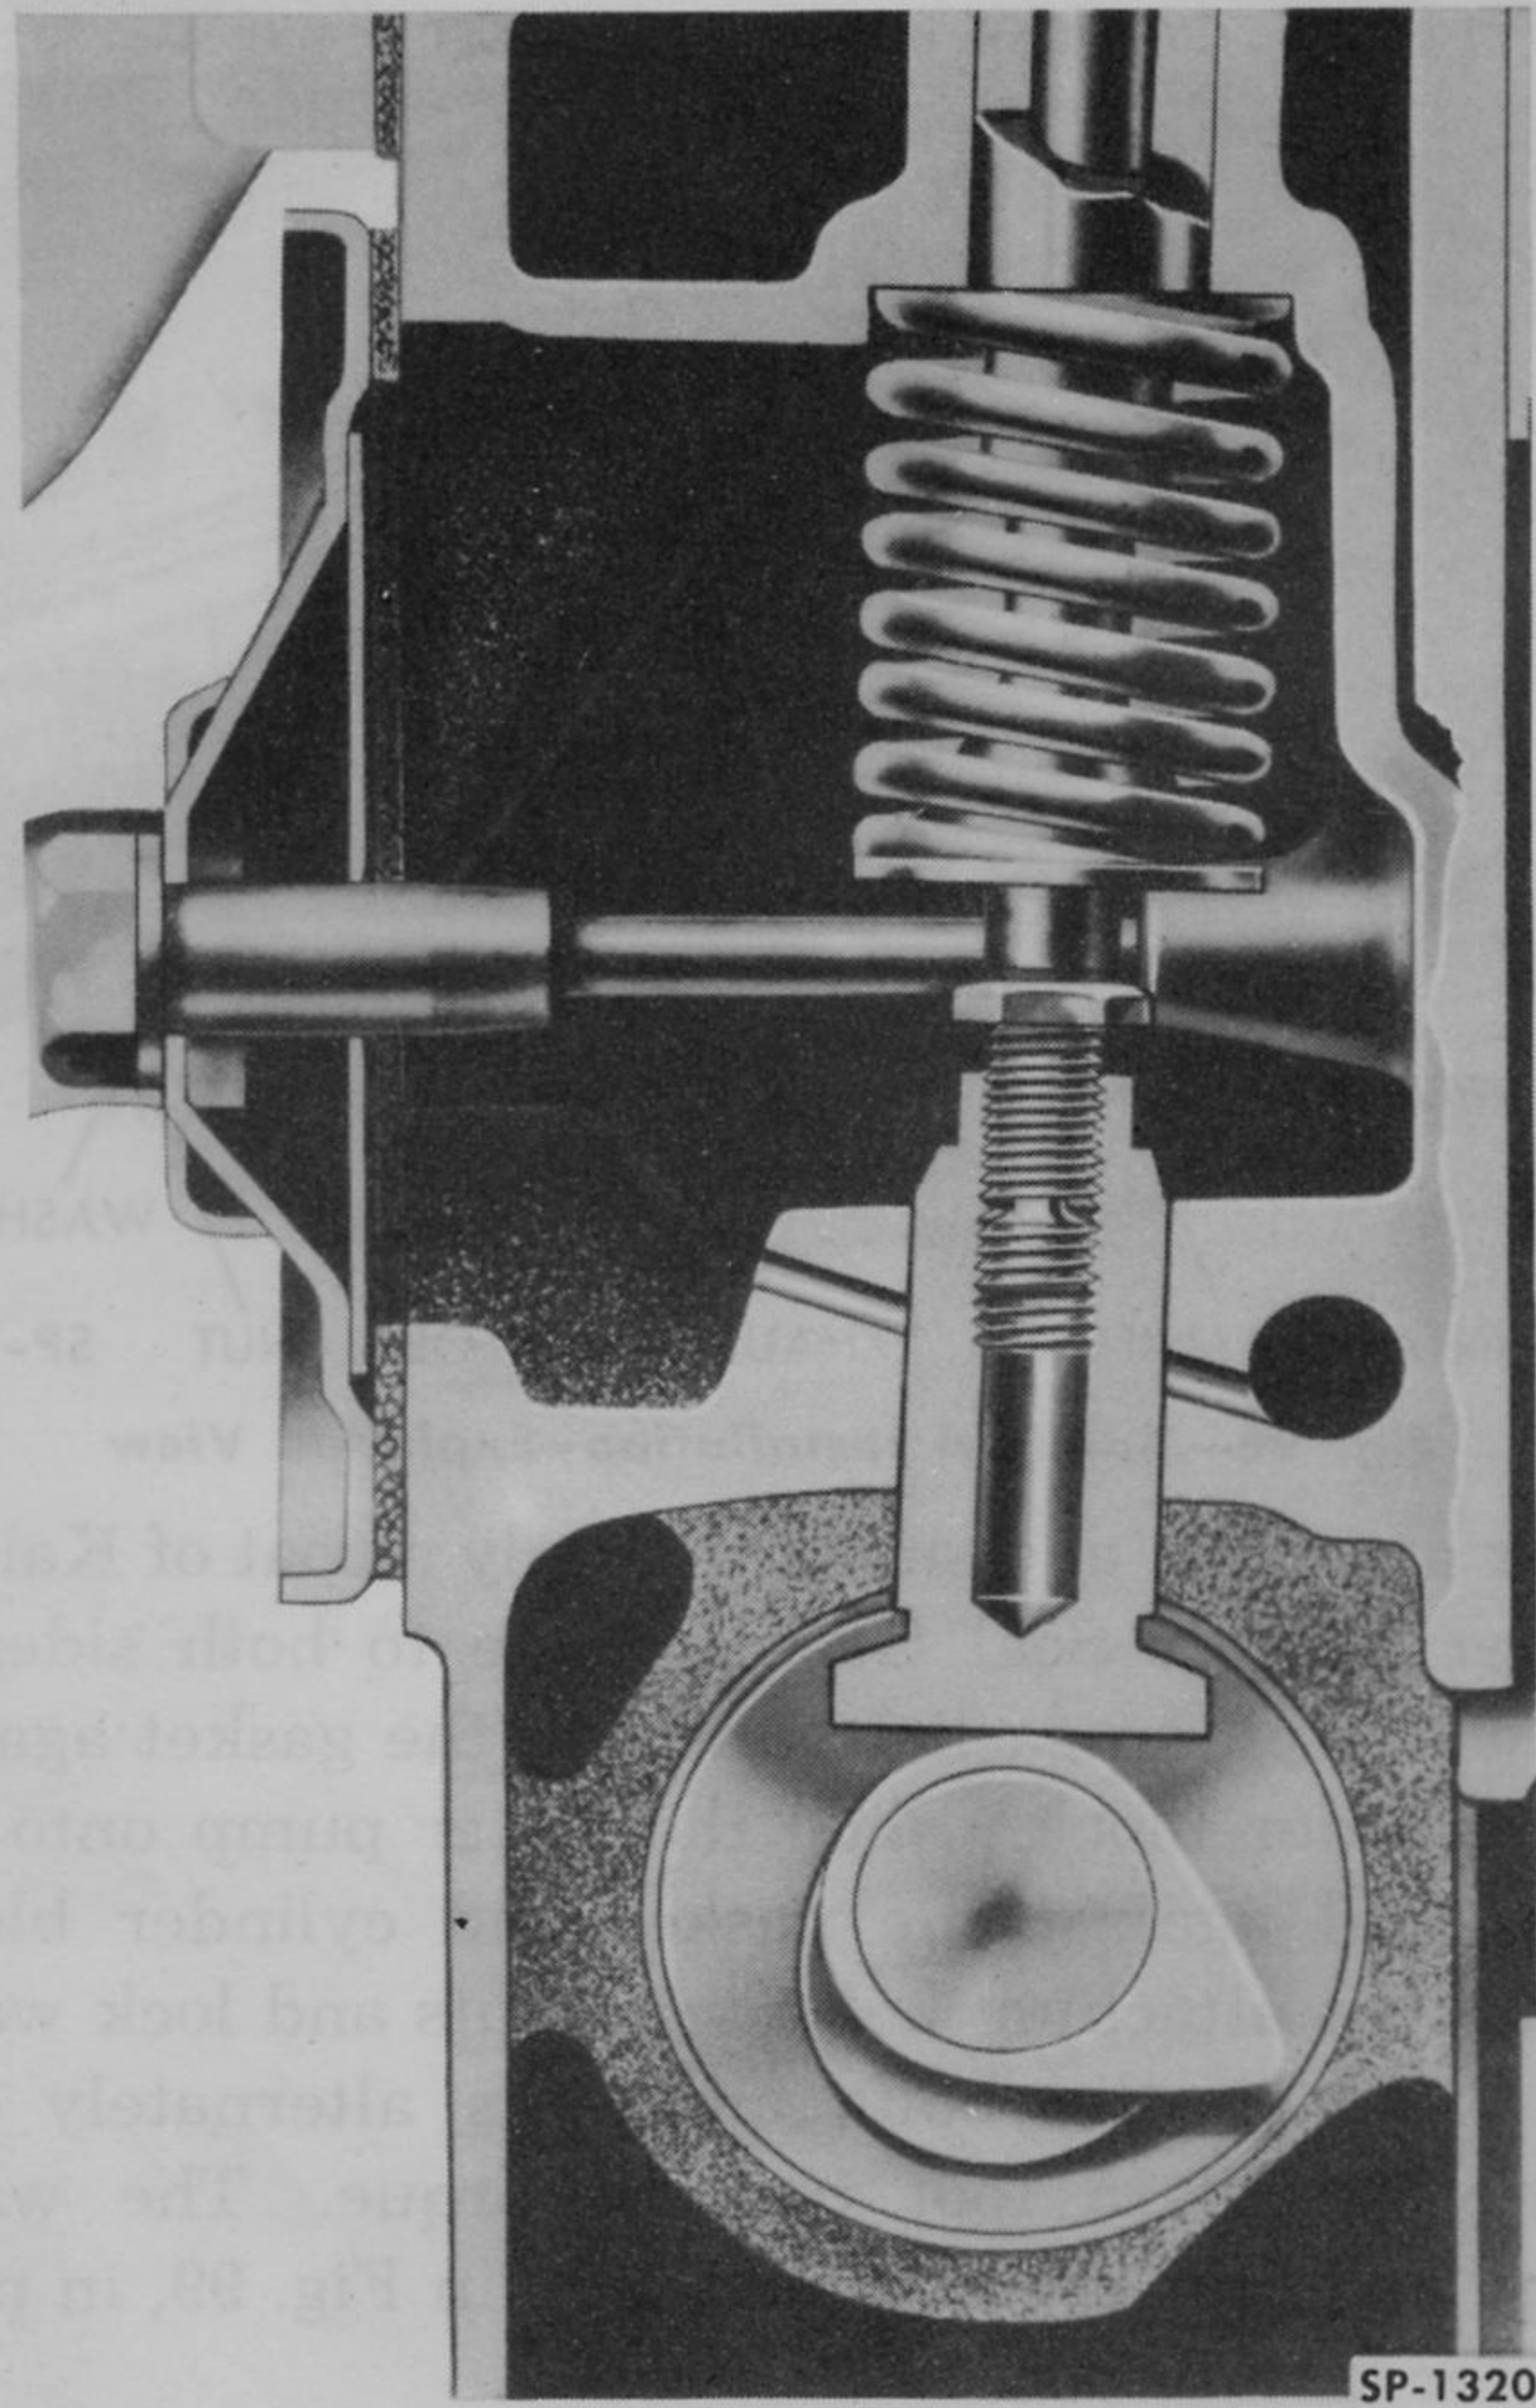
Camshaft, Tappet and Valve—Sectional View
